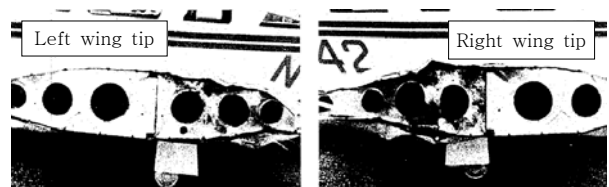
Damaged wing tip structures due to exploding navigation light wire harnesses<sup>[5]</sup>
